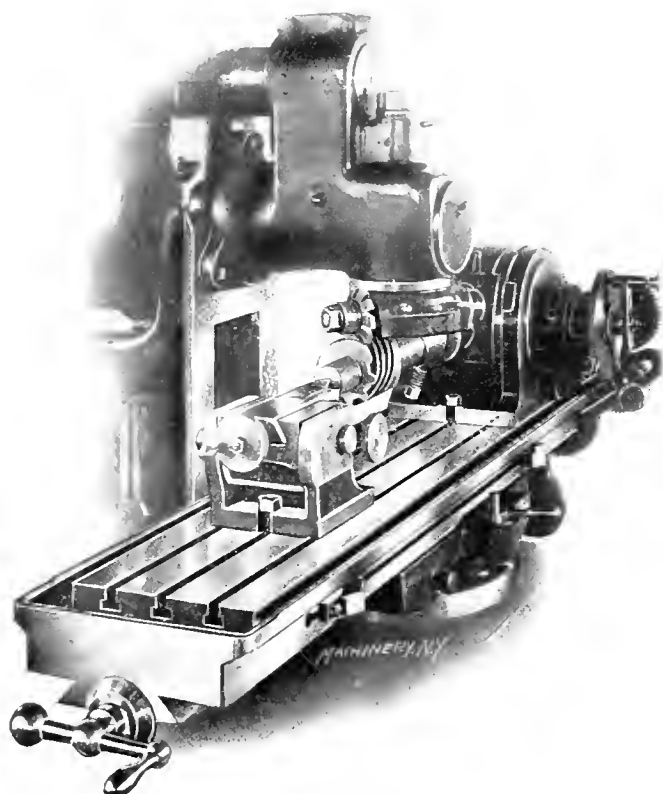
Universal Milling Attachment of the Cincinnati Milling Machine Co. in use Cutting Gears of Large Helix Angle.
